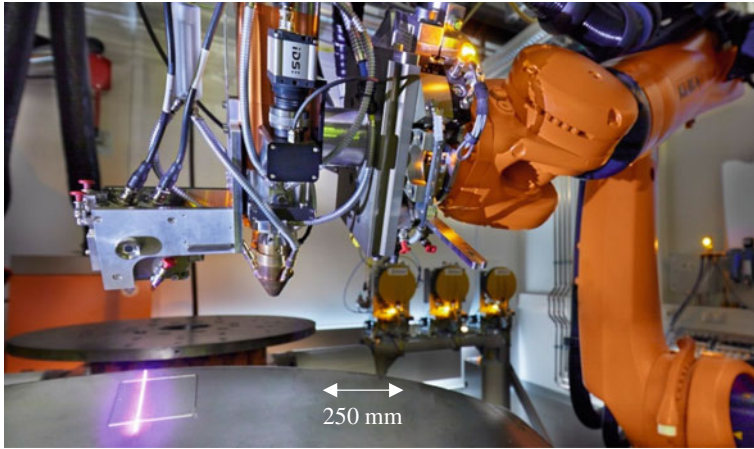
Robotic LMD cell during geometric measurement of welded layer and substrate for calculation of tool paths for the next layer. *Copyright Fraunhofer ILT / Ralf Baumgarten
